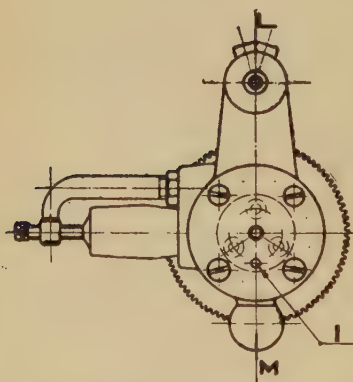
Borletti Piston Pump, Showing Side View. (Courtesy Fratelli Borletti, Milan.)
